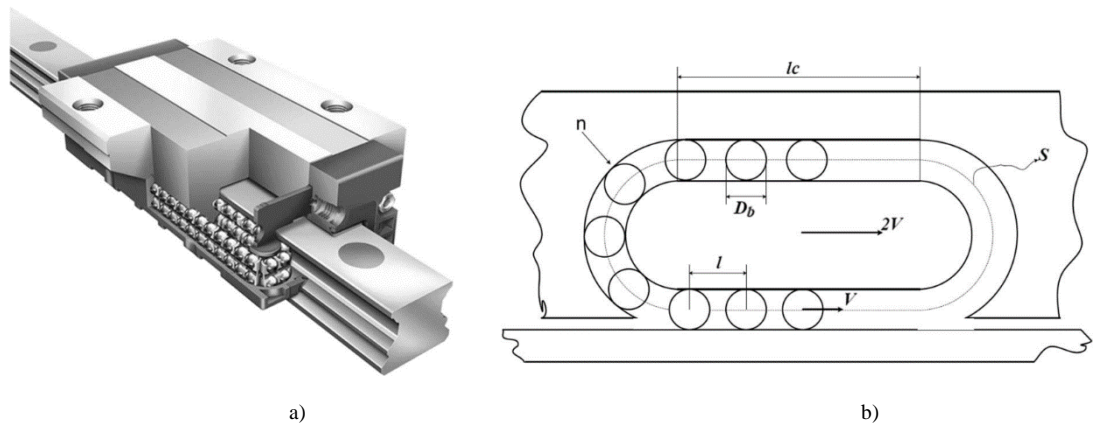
Rolling element linear bearing: a) Cutaway view; b) simplified model [47]
